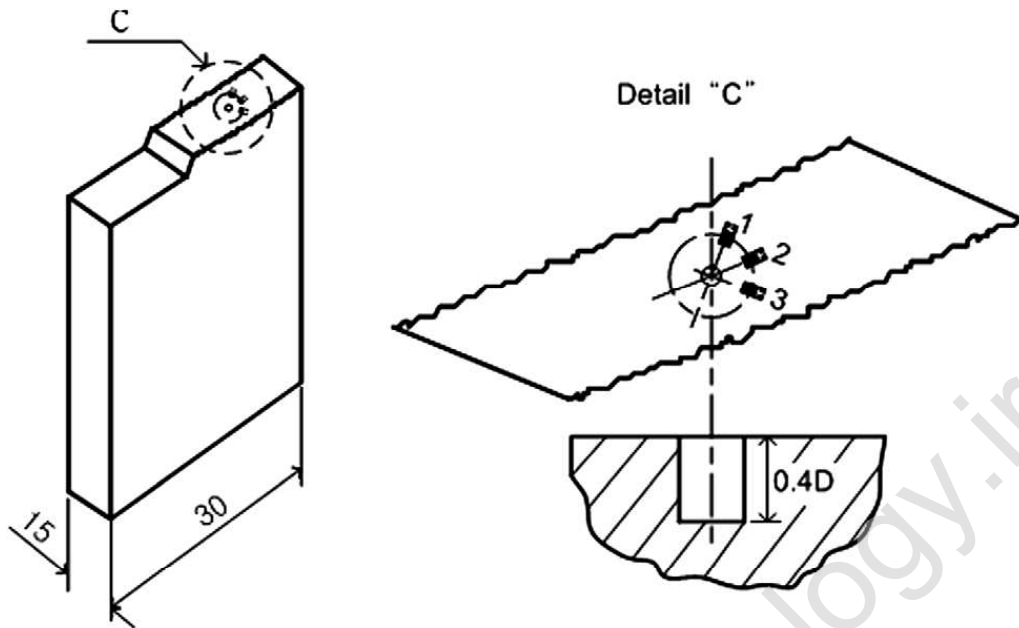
Schematic illustration of HDM on fatigue fractured surface of SEB.
